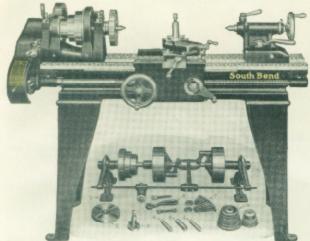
Draw-in Collet Chuck and Turret for Making Small Parts.
